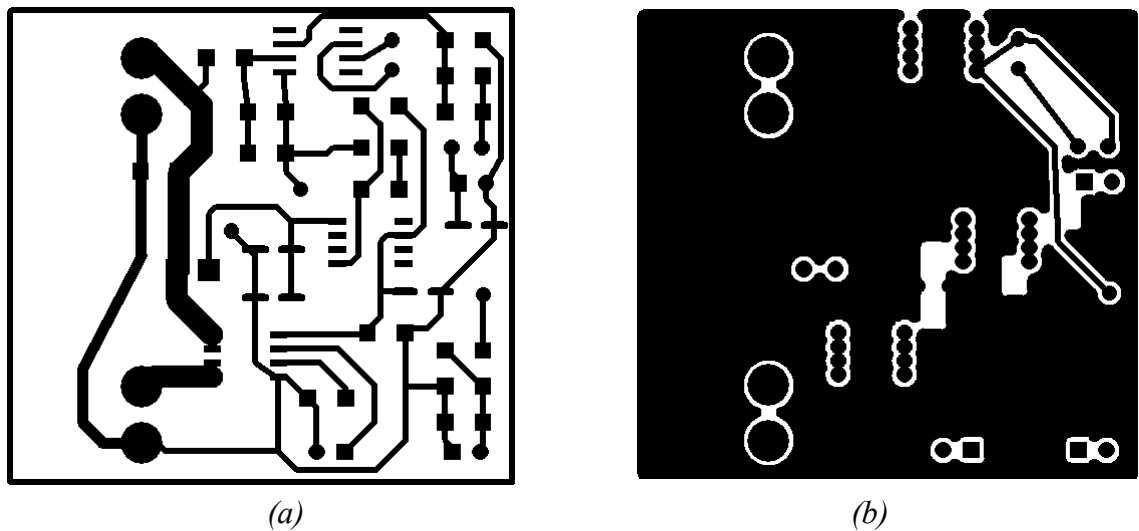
The final PCB layout of the measuring circuit with copper traces and a) shows the top side and b) side shows the bottom side of the PCB
